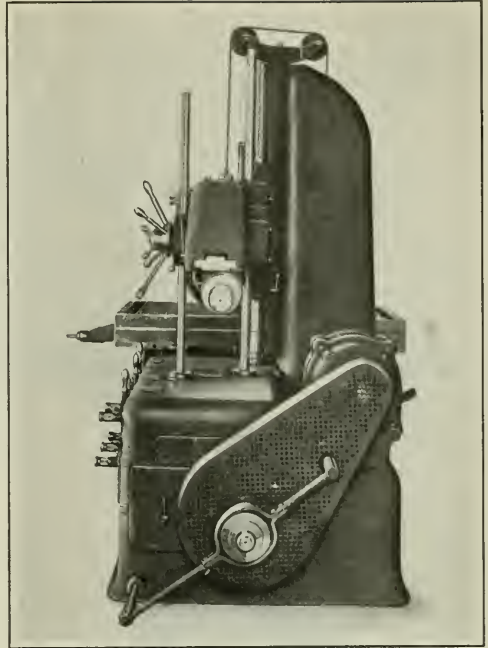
End View of Boring Machine, illustrating the Motor Driving Arrangement
